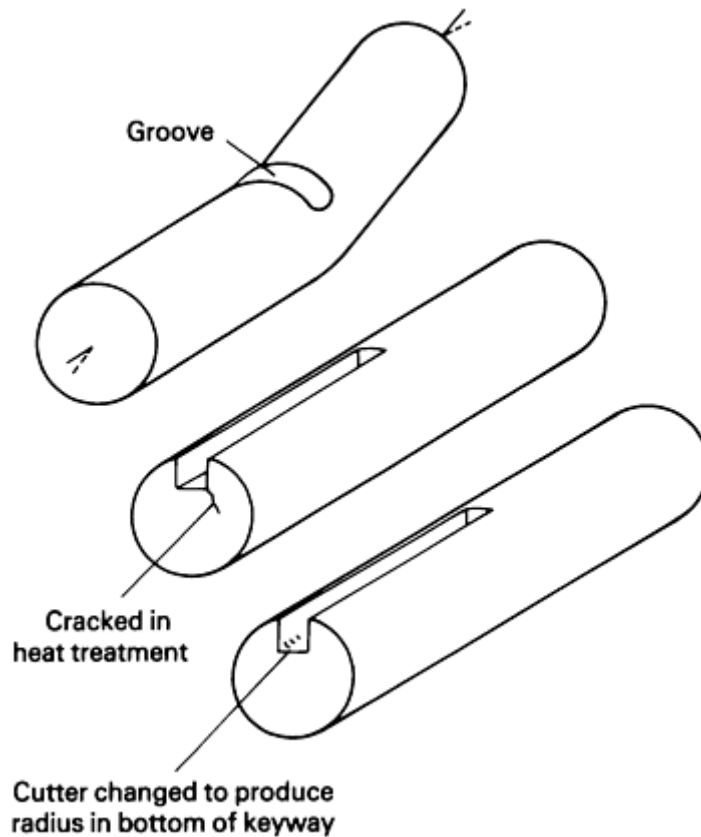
(c) Grooves will cause a shaft to warp in heat treating (top). A keyway with sharp corners often initiates cracks in quenching (center). The keyway crack problem is avoided with a radius (bottom). Source: Ref 23
